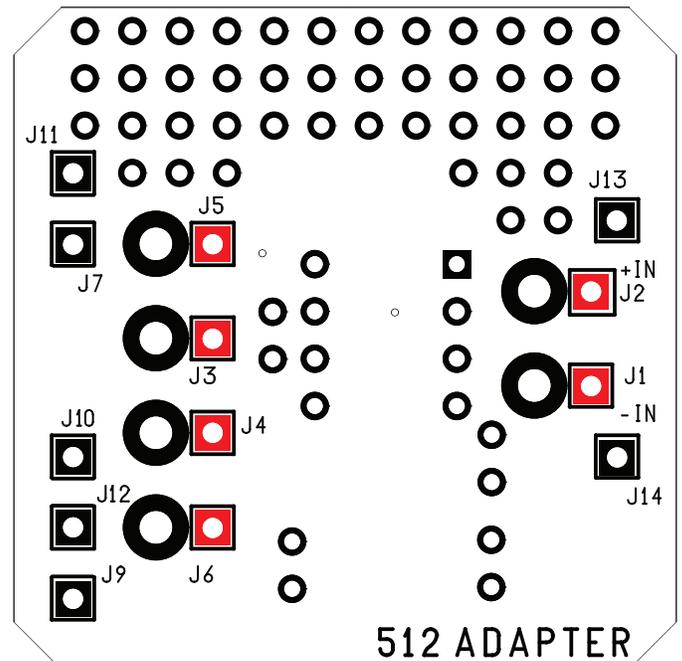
Solder/Bottom Side of PCB showing 990/2520 0.040x0.300 PIN locations in red.
